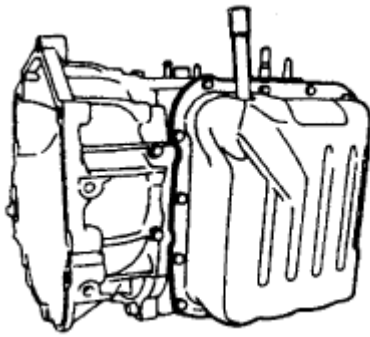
Identifying Torque Converter Housing To Transmission Case Bolts (3 Of 3)
